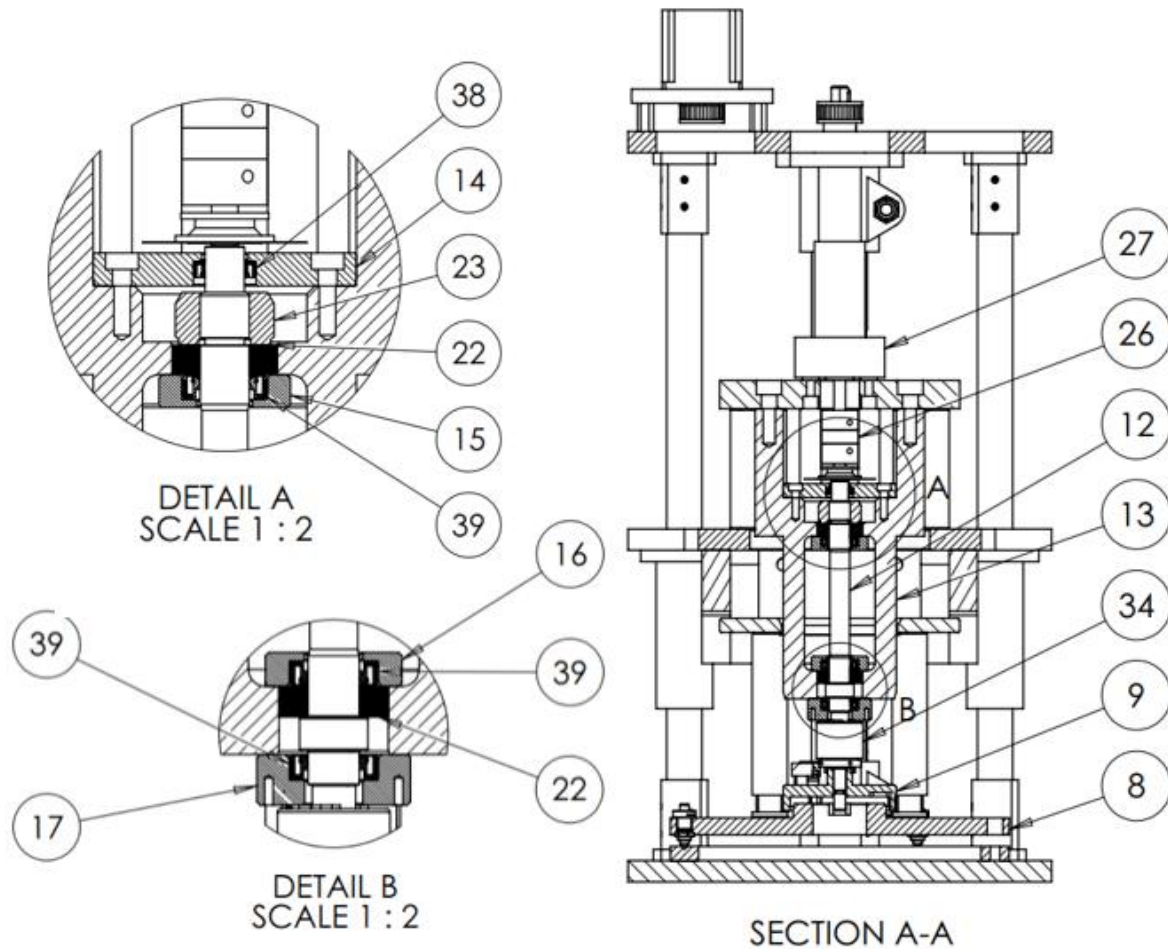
Figure showing the shaft mount (part no. 13) which was line bored to machine the hole for bearing housing (bearings part no. 22).
